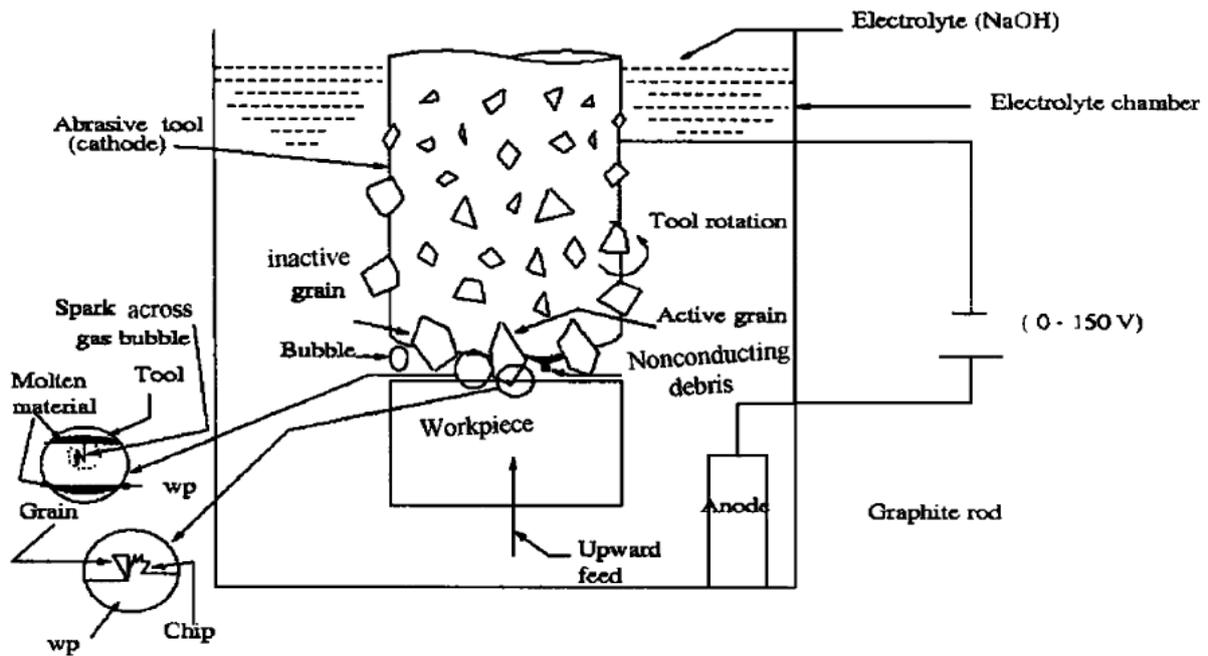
Machining mechanism with abrasive cutting tools (Jain et al. 2002).
